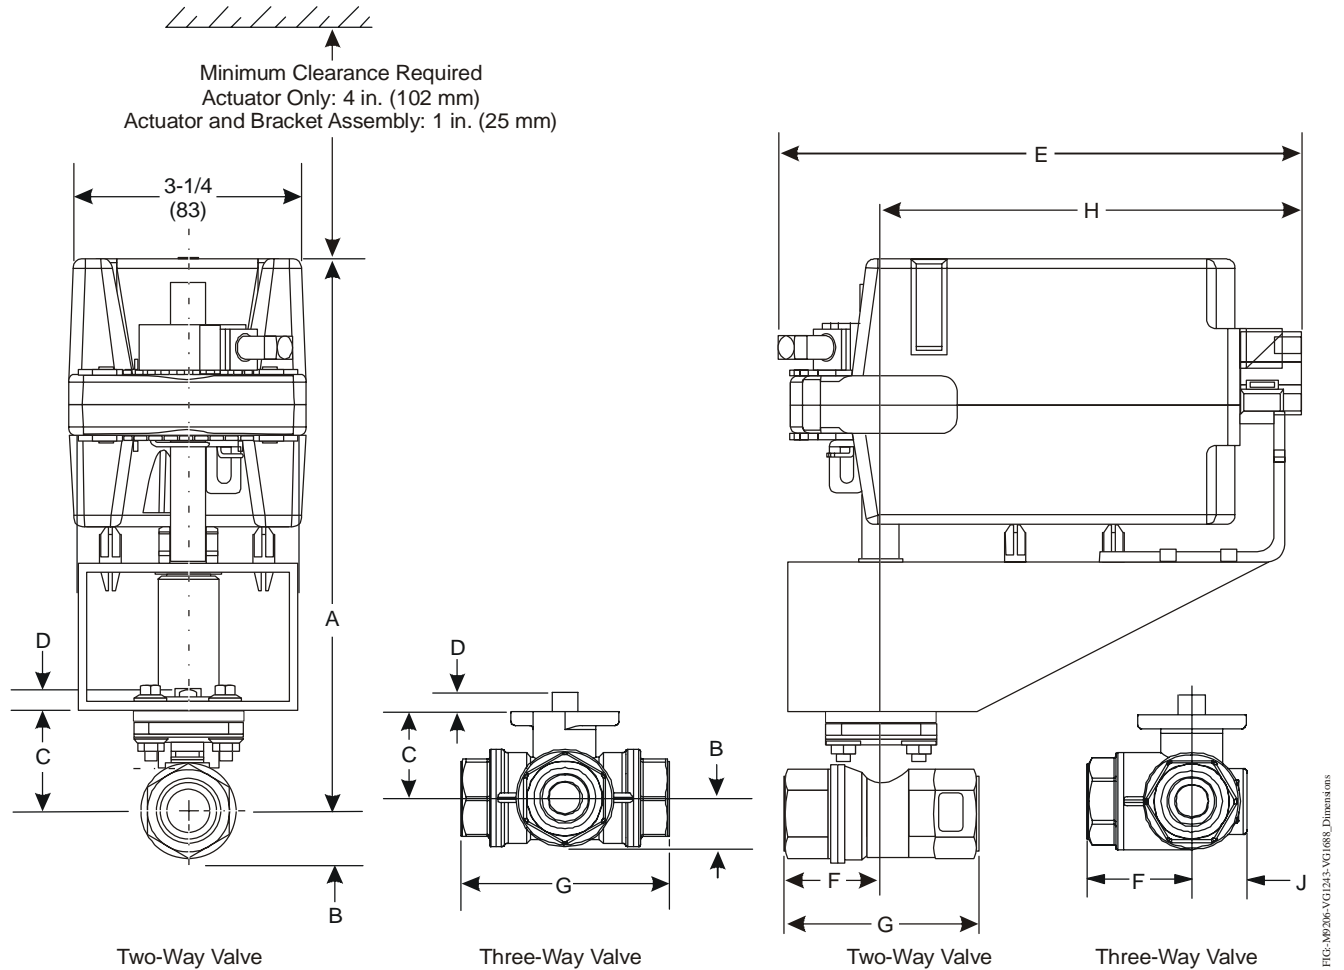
Actuated Ball Valve Dimensions, in. (mm)
